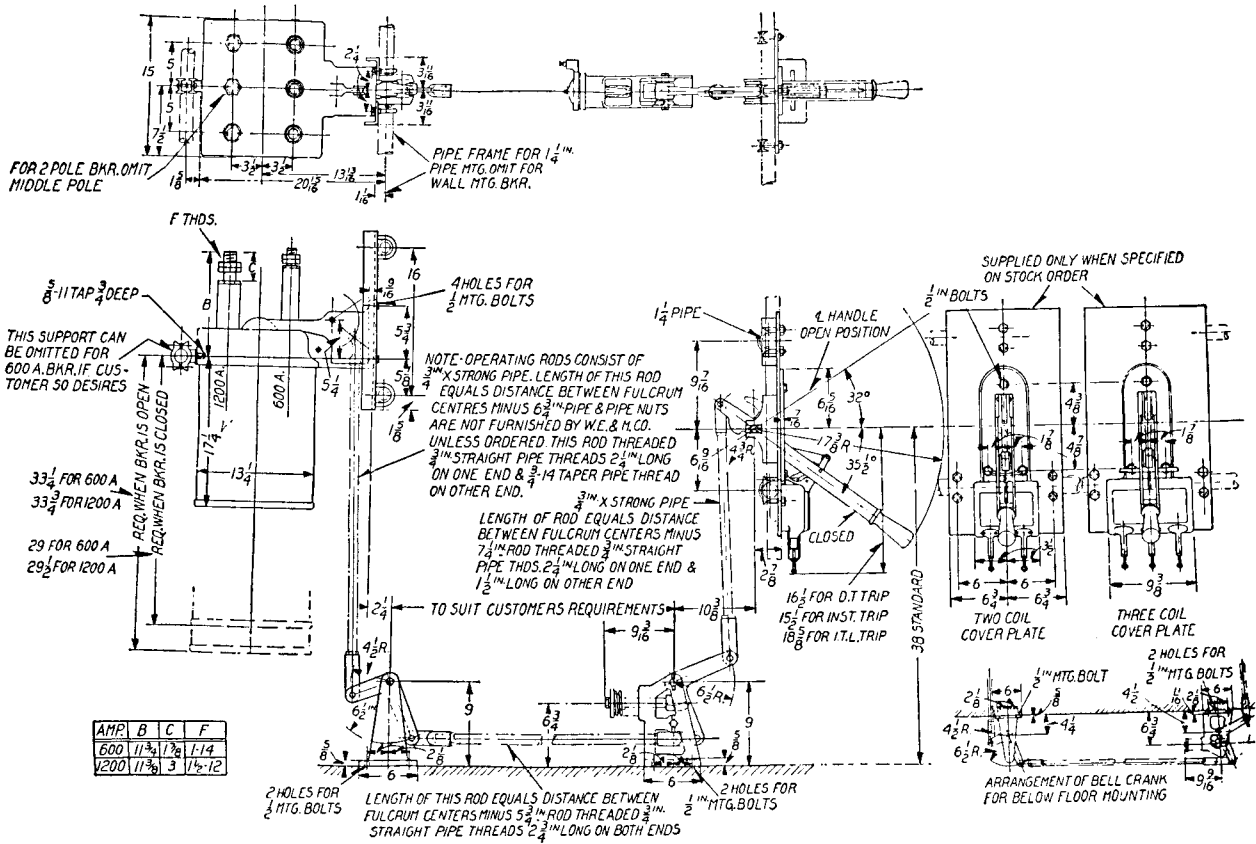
OUTLINE, SHOWING REMOTE MOUNTING DETAILS FOR TYPE F-124-A OIL CIRCUIT-BREAKER
